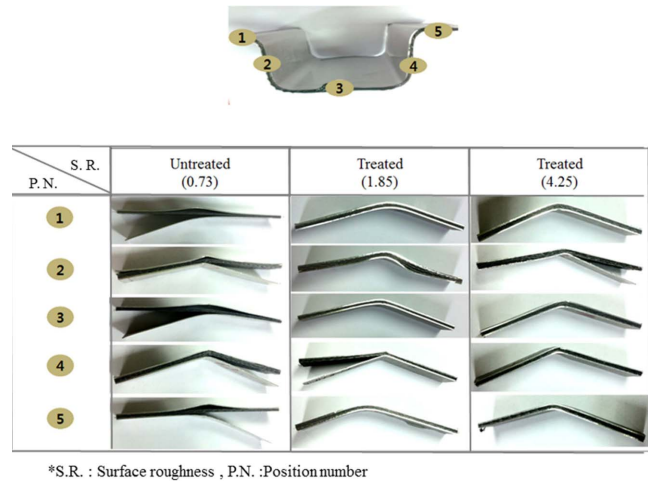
Side view of bending specimens after bending test according to surface roughness
